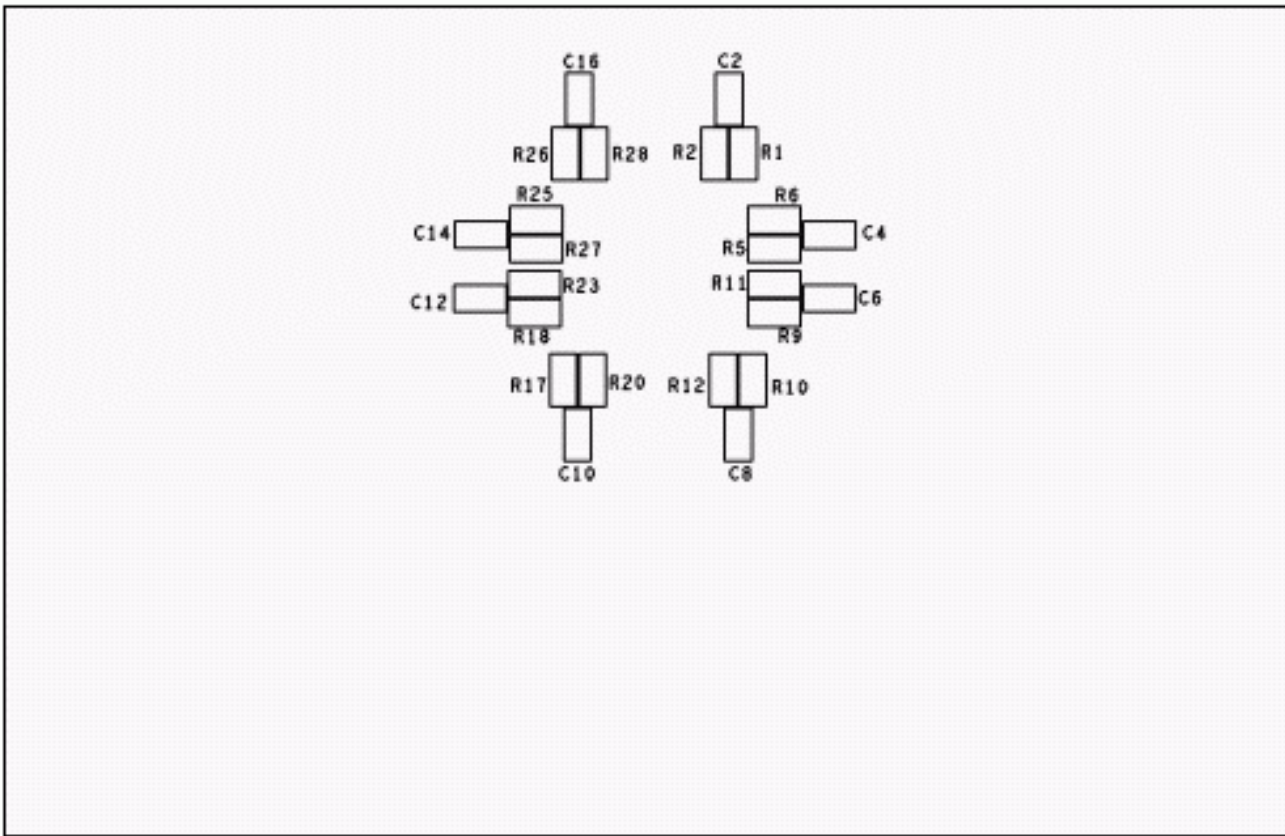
E1x8 120 Ω impedance -- Silkscreen bottom layer layout (view mirrored)
